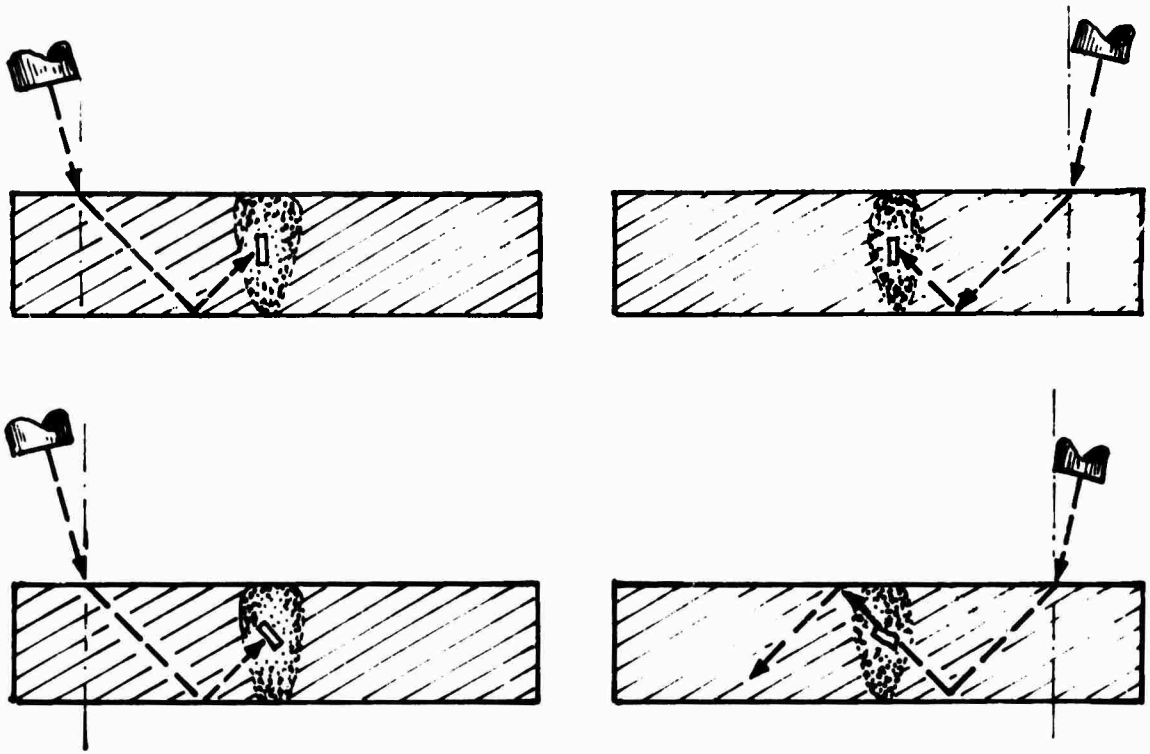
INSPECTION OF WELD FROM BOTH SIDES
